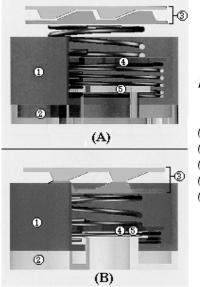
New humeral rotator mechanism (1) Upper housing, (2) Bottom housing (3) Cam system, (4) Internal gear (5) Gear
